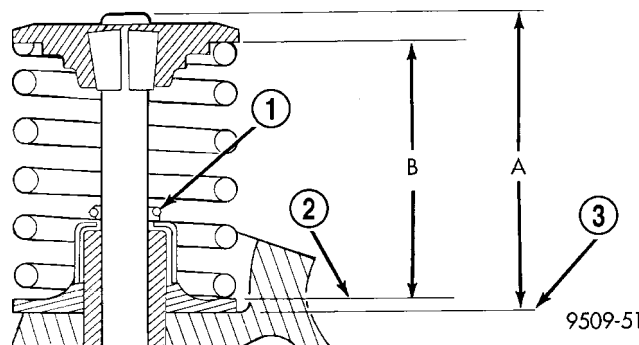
Checking Spring Installed Height and Valve Tip Height Dimensions
